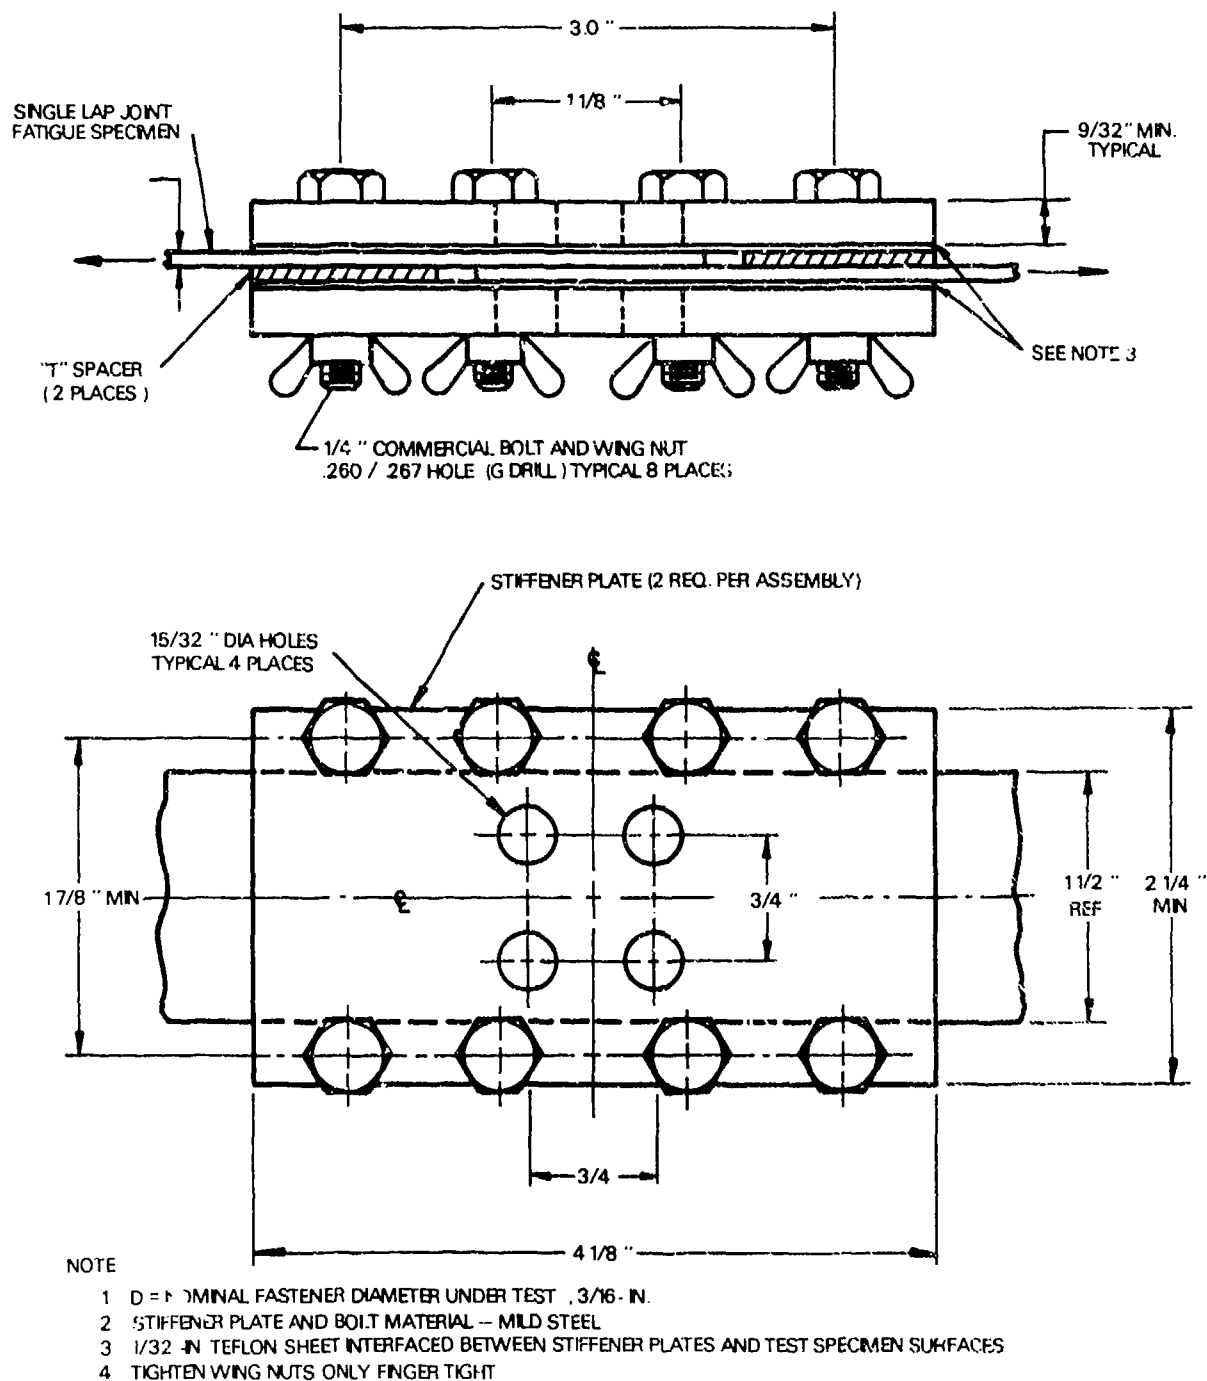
Specimen Restraining Fixture (Sandwich Type)
